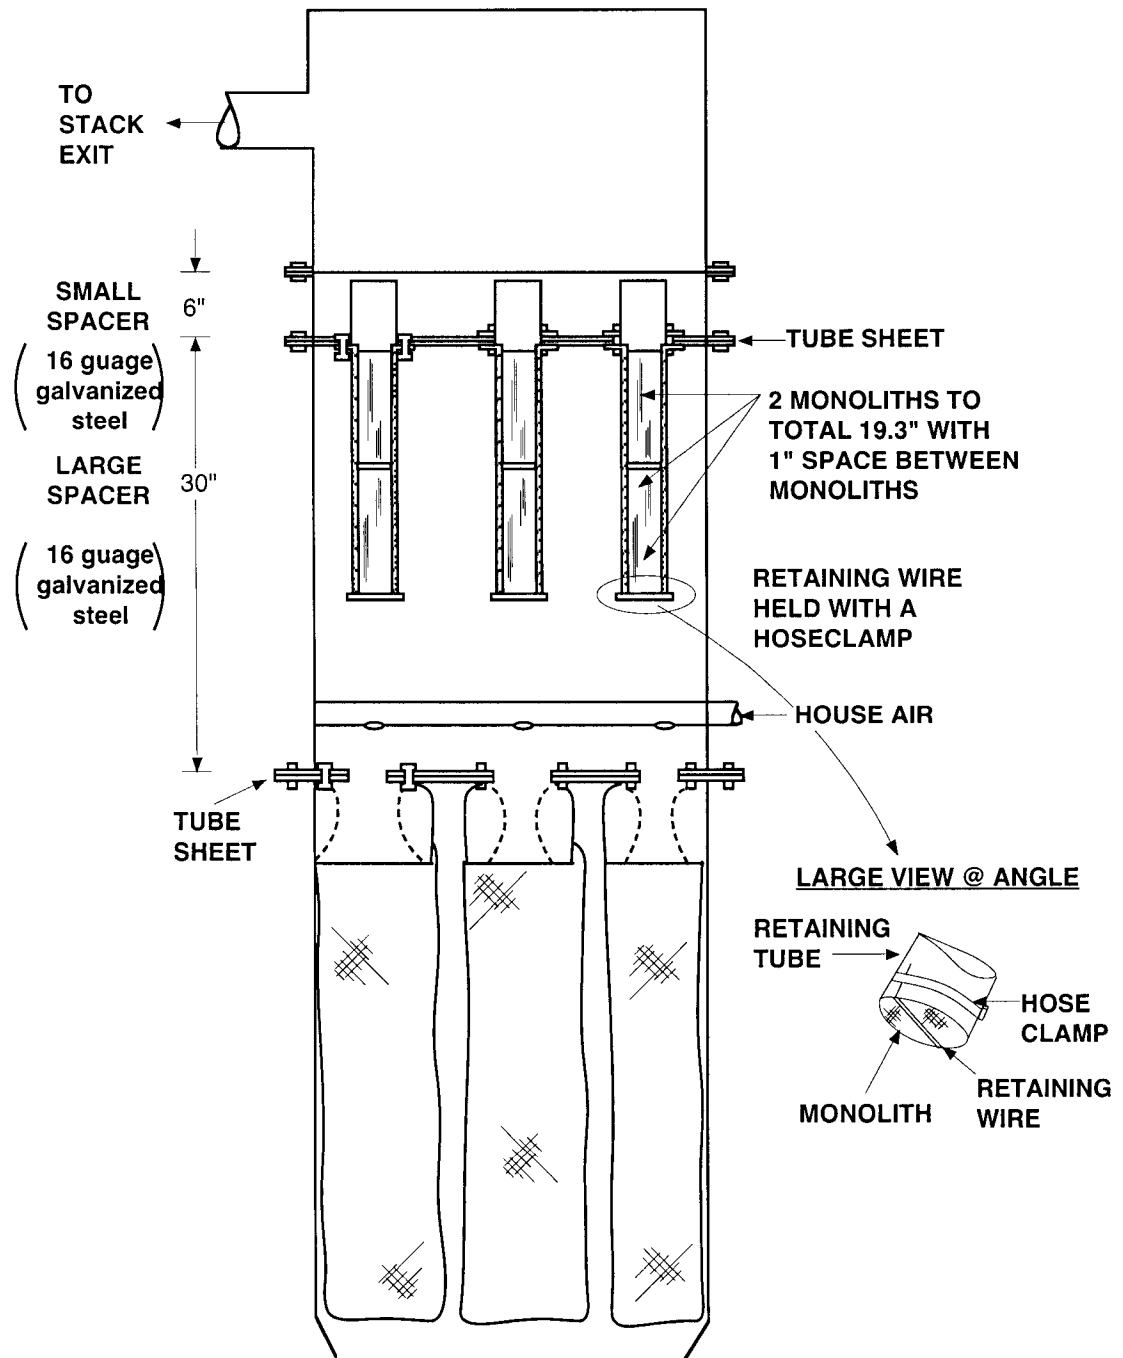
CROSS SECTION OF BAGHOUSE WITH MONOLITHS ABOVE FILTER BAGS
